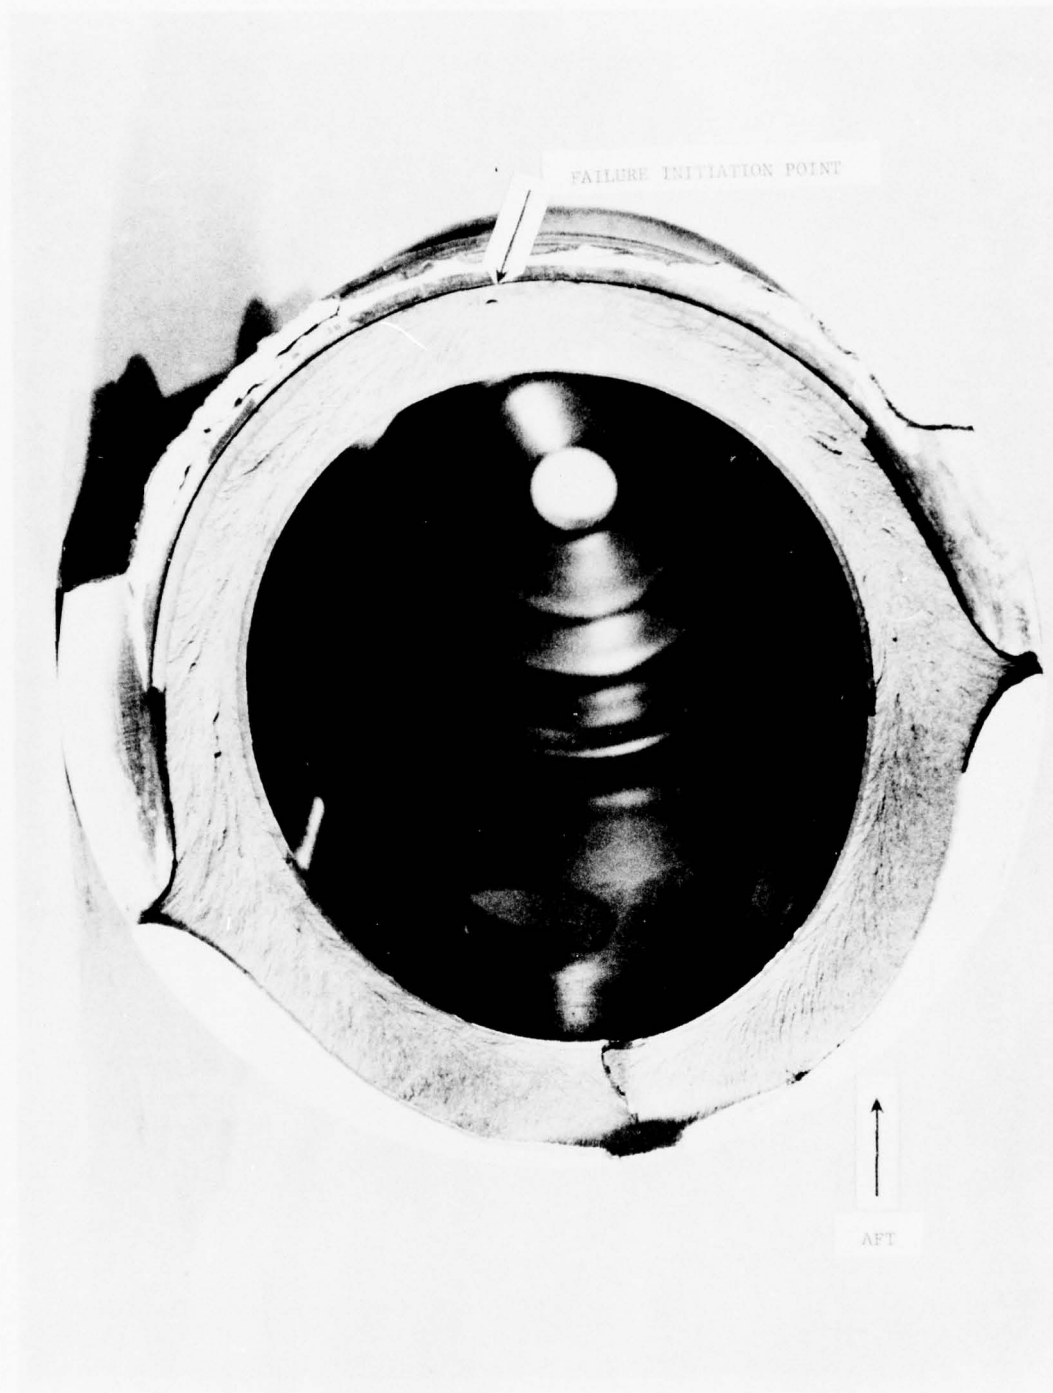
Outer Cylinder Failure - Lower Fracture Surface
